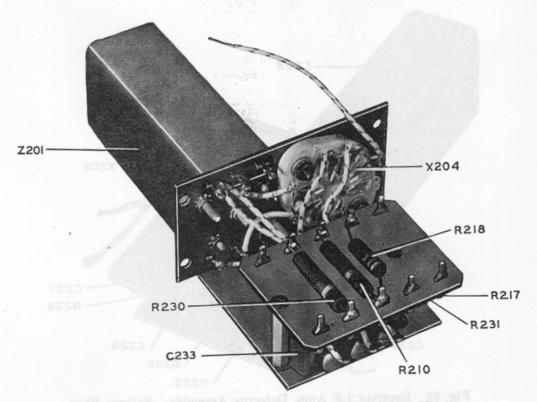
Receiver 1st I-F Amp. Assembly—Bottom View
